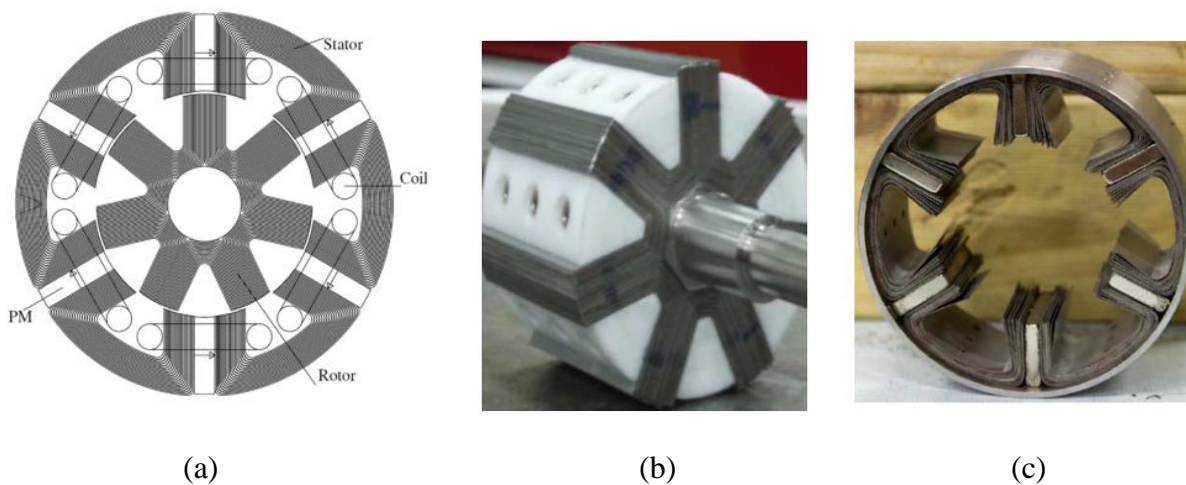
Structure of the axially laminated-structure flux-switching PM machine, (a) whole machine configuration, (b) prototype rotor, (c) prototype stator [263], [264].
